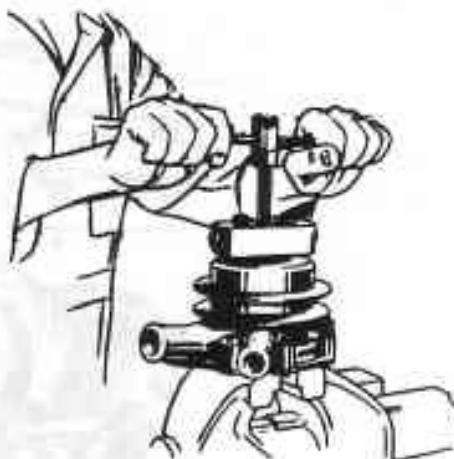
REMOVING PULLEY FROM SPINDLE.
